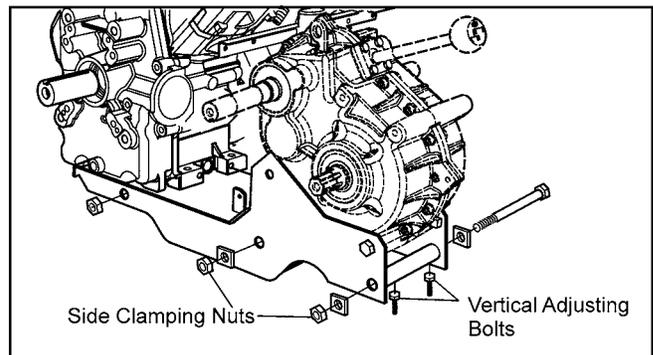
Location of power pack clamping nuts and adjusting bolts
